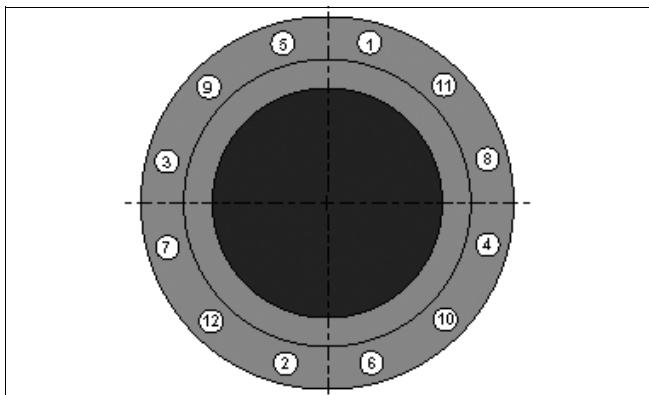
Example for flange-mounting the pipelines with 12 flange holes in a crosswise fashion.
